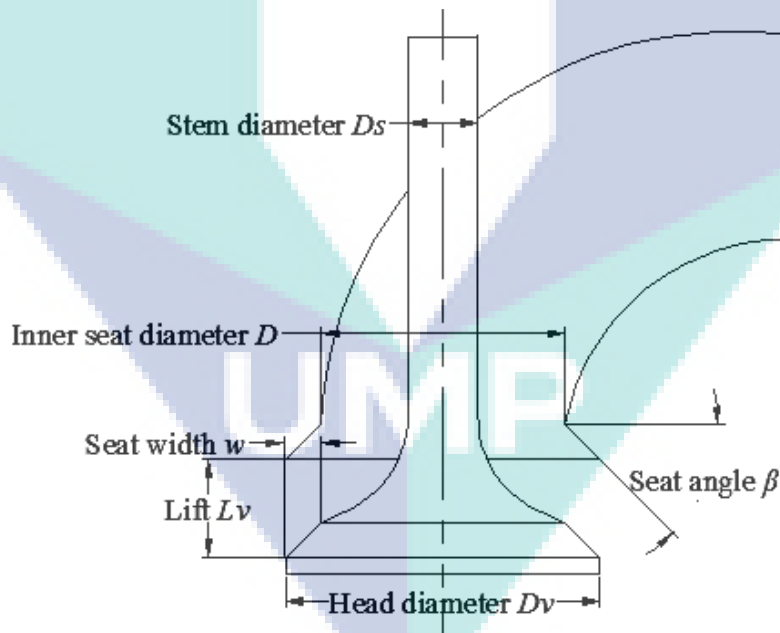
Valve geometry for most engines with parameters defining the valve (Heywood [36])
